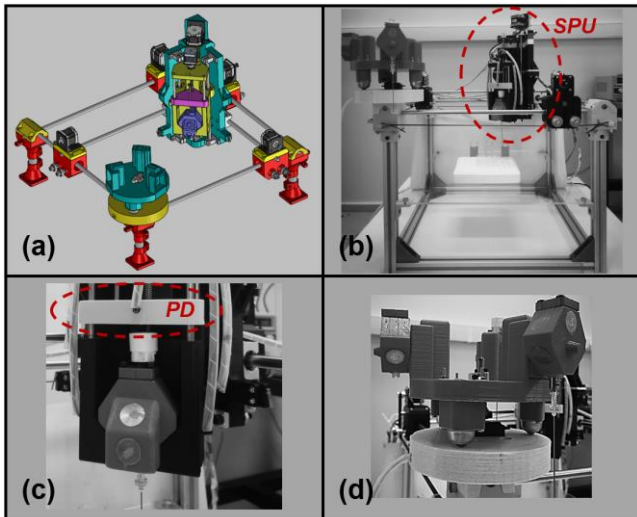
(a) CAD of the mechanism, (b) overall view of the mechanism (c) piston driving unit, and (d) syringe substitution unit.
